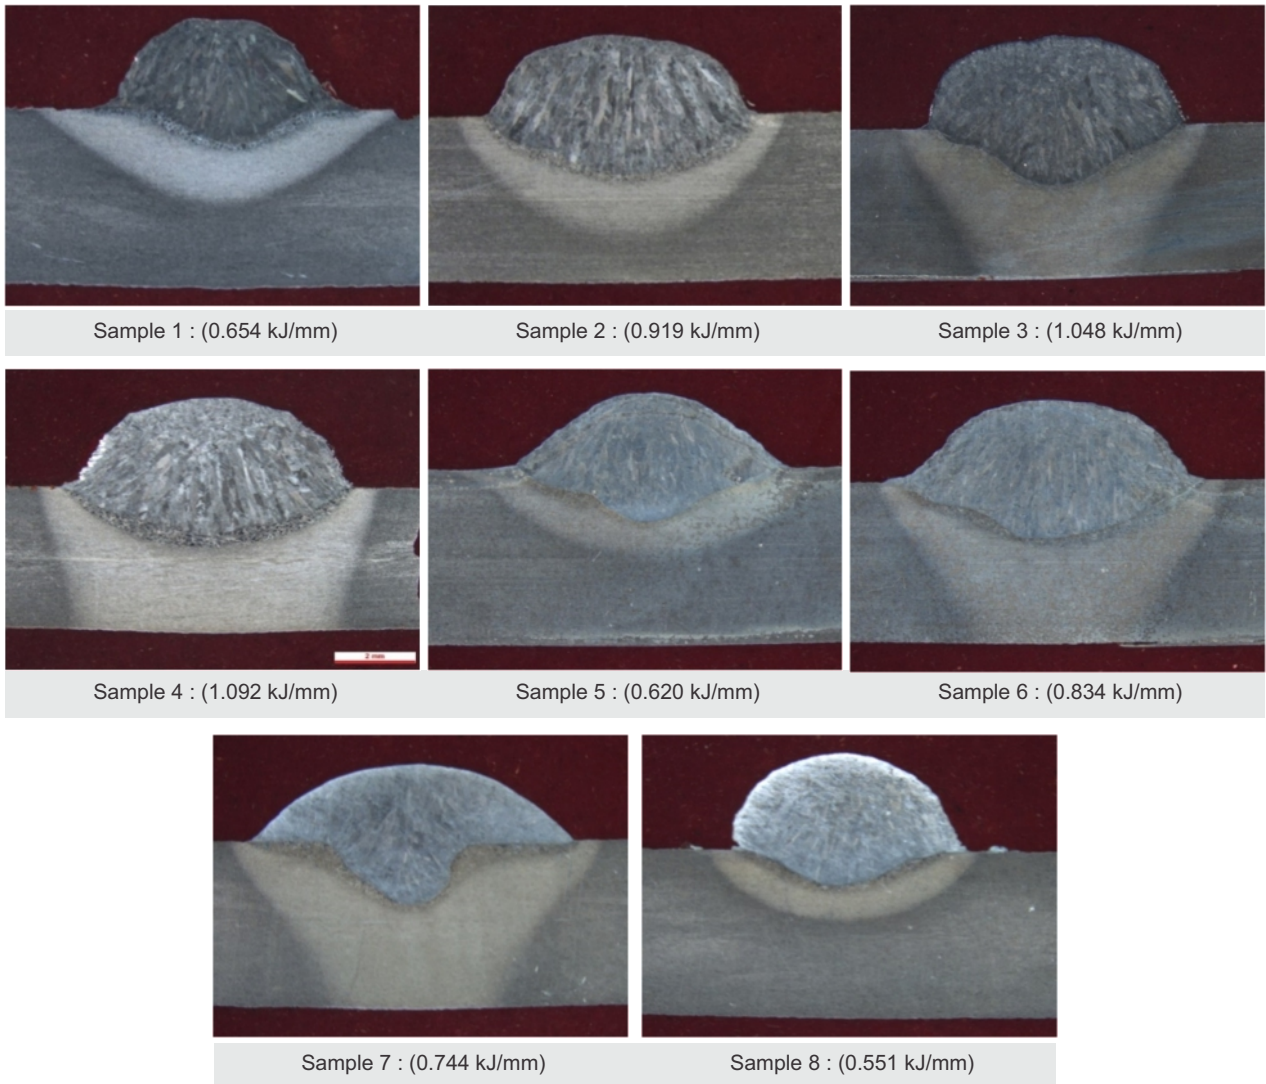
Macrographs of weld samples at different heat inputs
